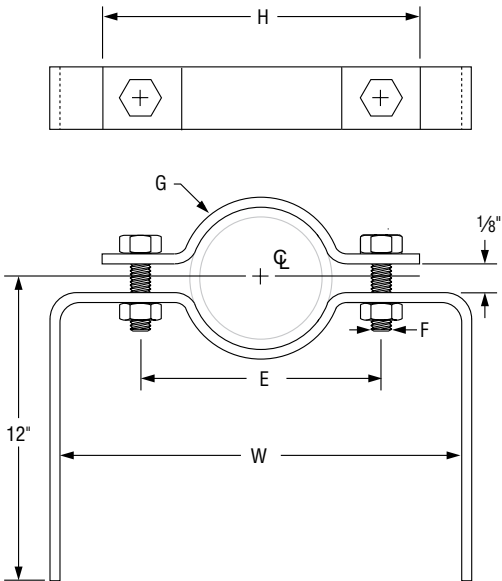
WEIGHT (LBS) • DIMENSIONS (IN)
